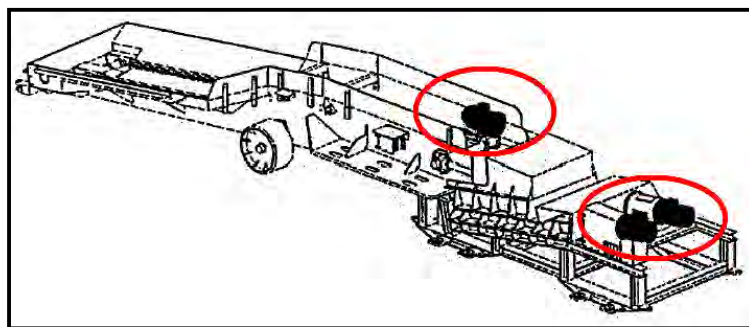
Location of the conveyor and crusher motors on a feeder breaker [5].
